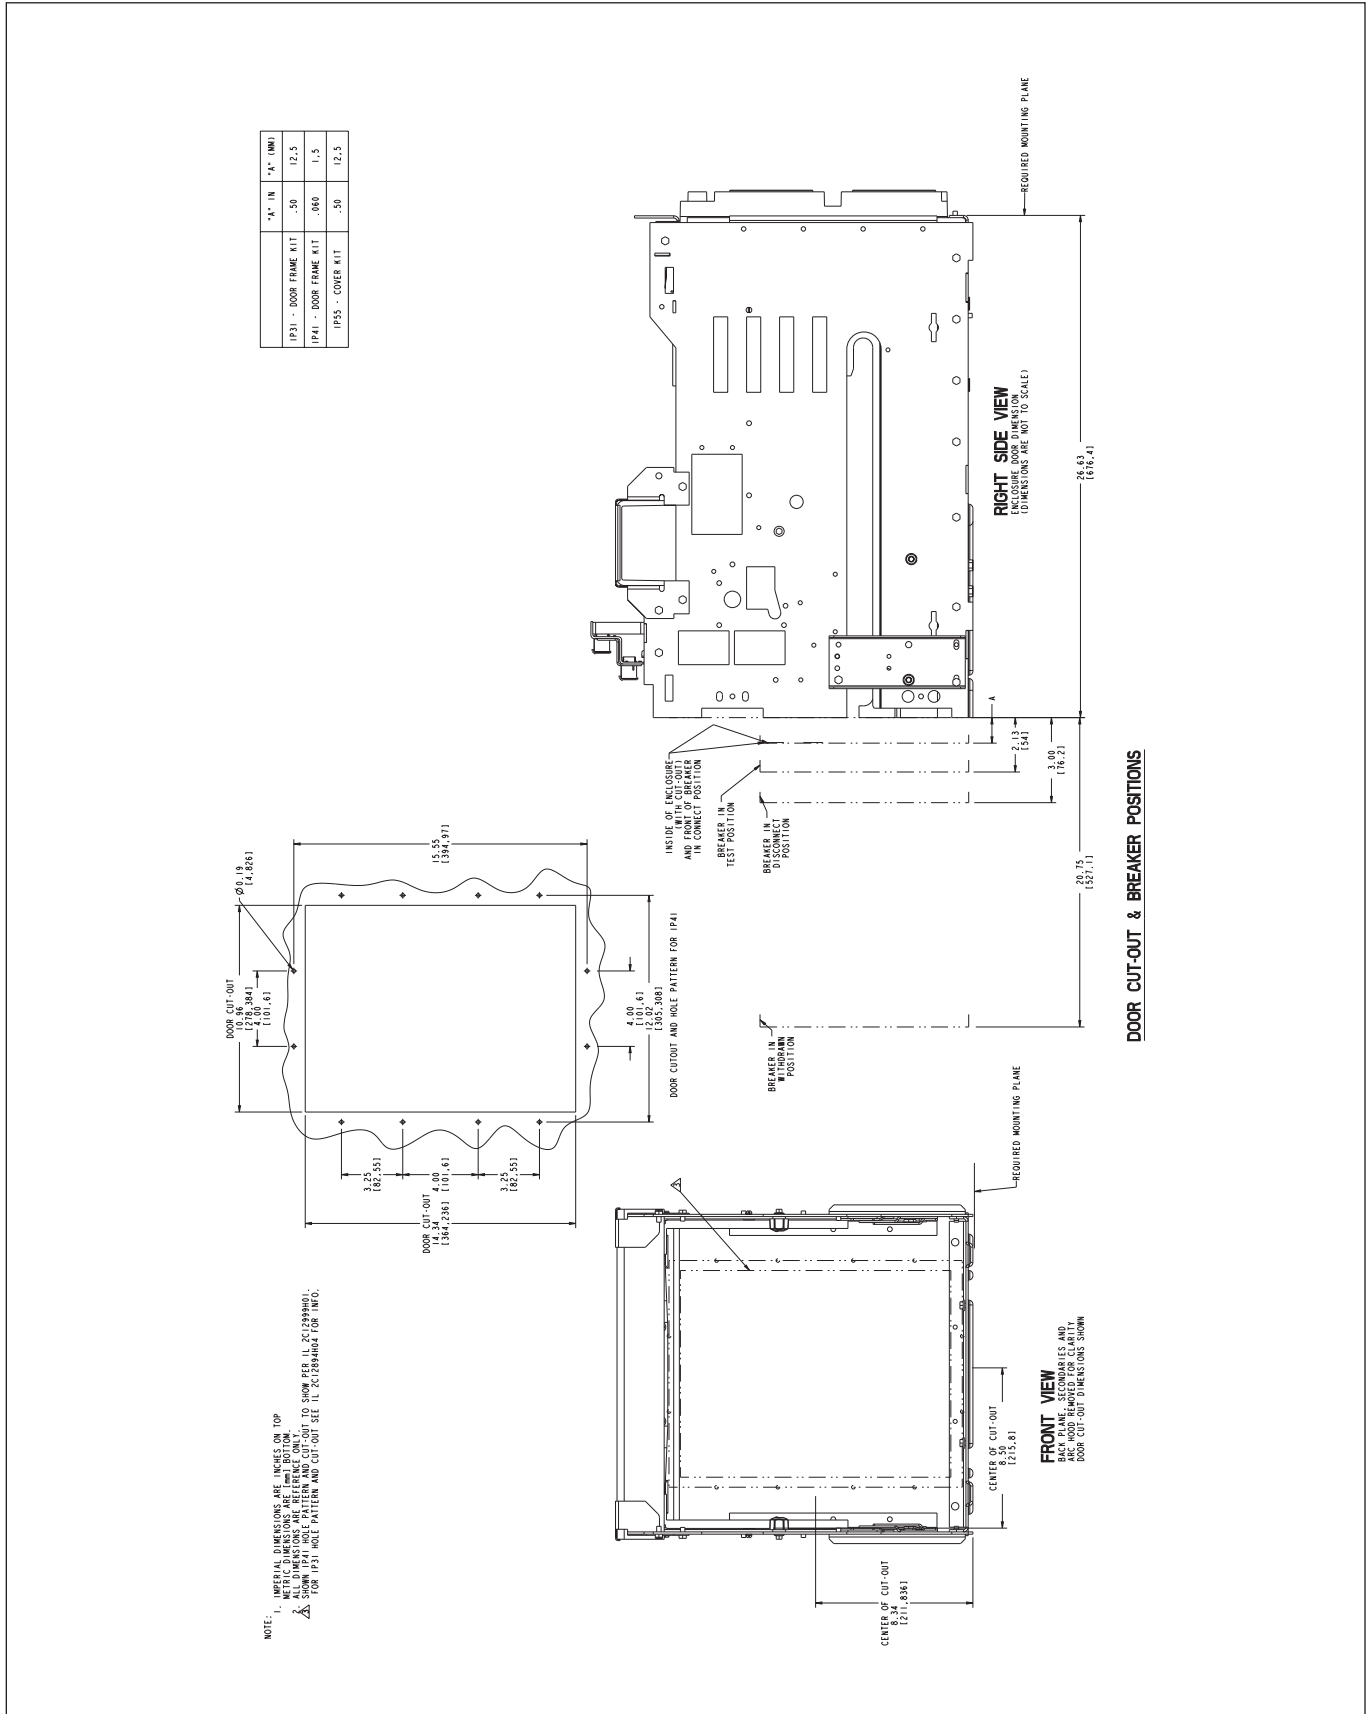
800-2000A MDSL Cassette accessory dimensions
